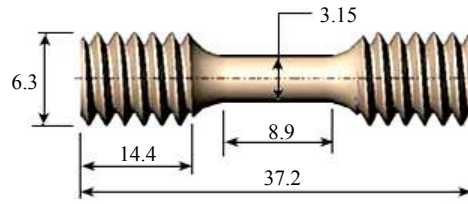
Specimen used in the quasi-static, fatigue and dynamic tests. Dimensions in mm
